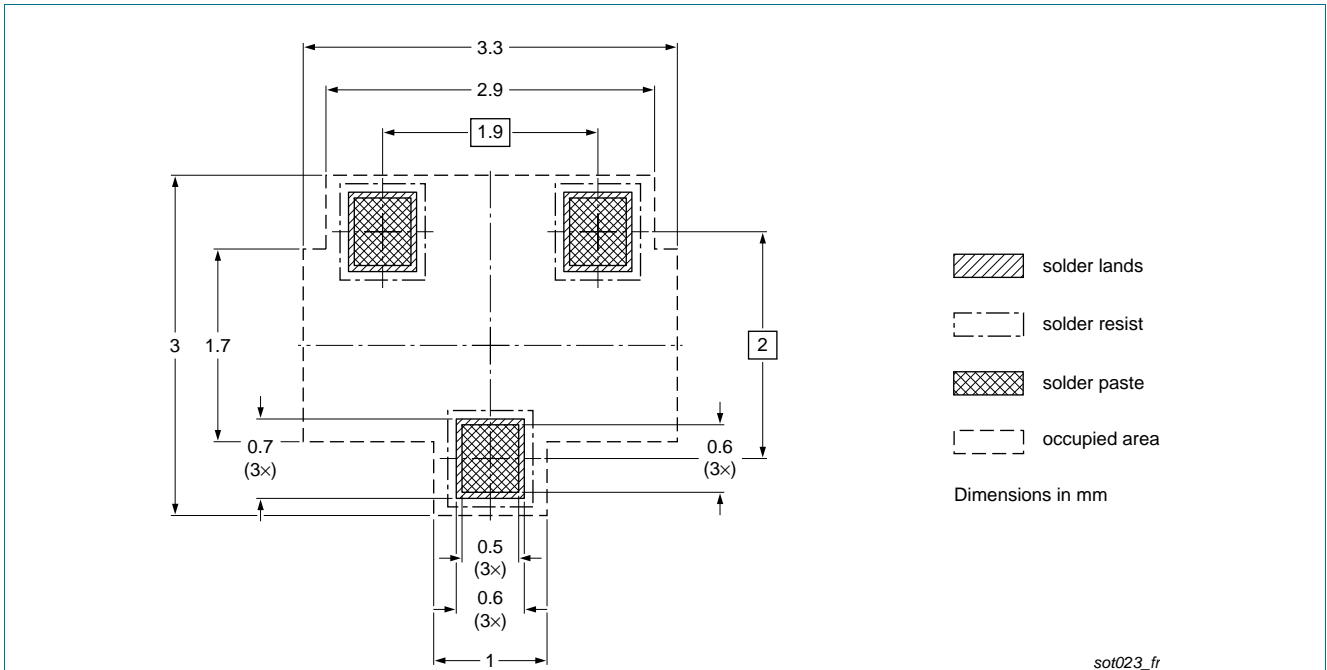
Reflow soldering footprint for SOT23 (TO-236AB)
